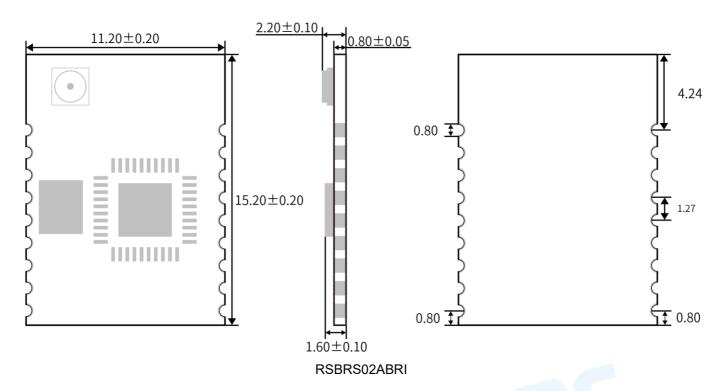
Recommended PCB Footprint of RSBRS02ABR(I) (mm)
